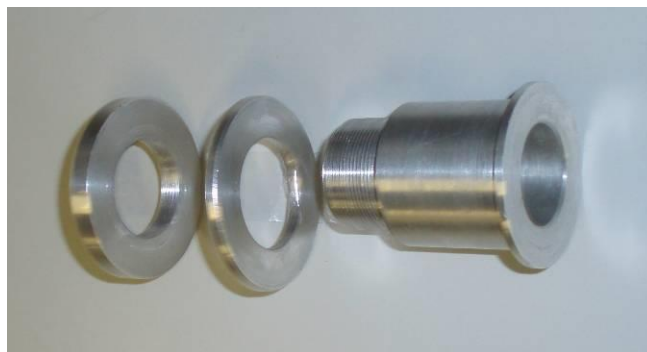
Choke sleeve assembly, showing the retaining nut spaces and sleeve
